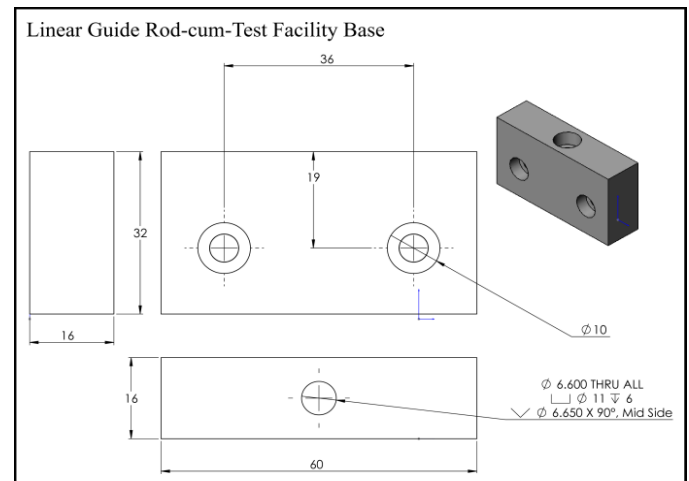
Linear Guide Rod-cum Thrust Stand Base
